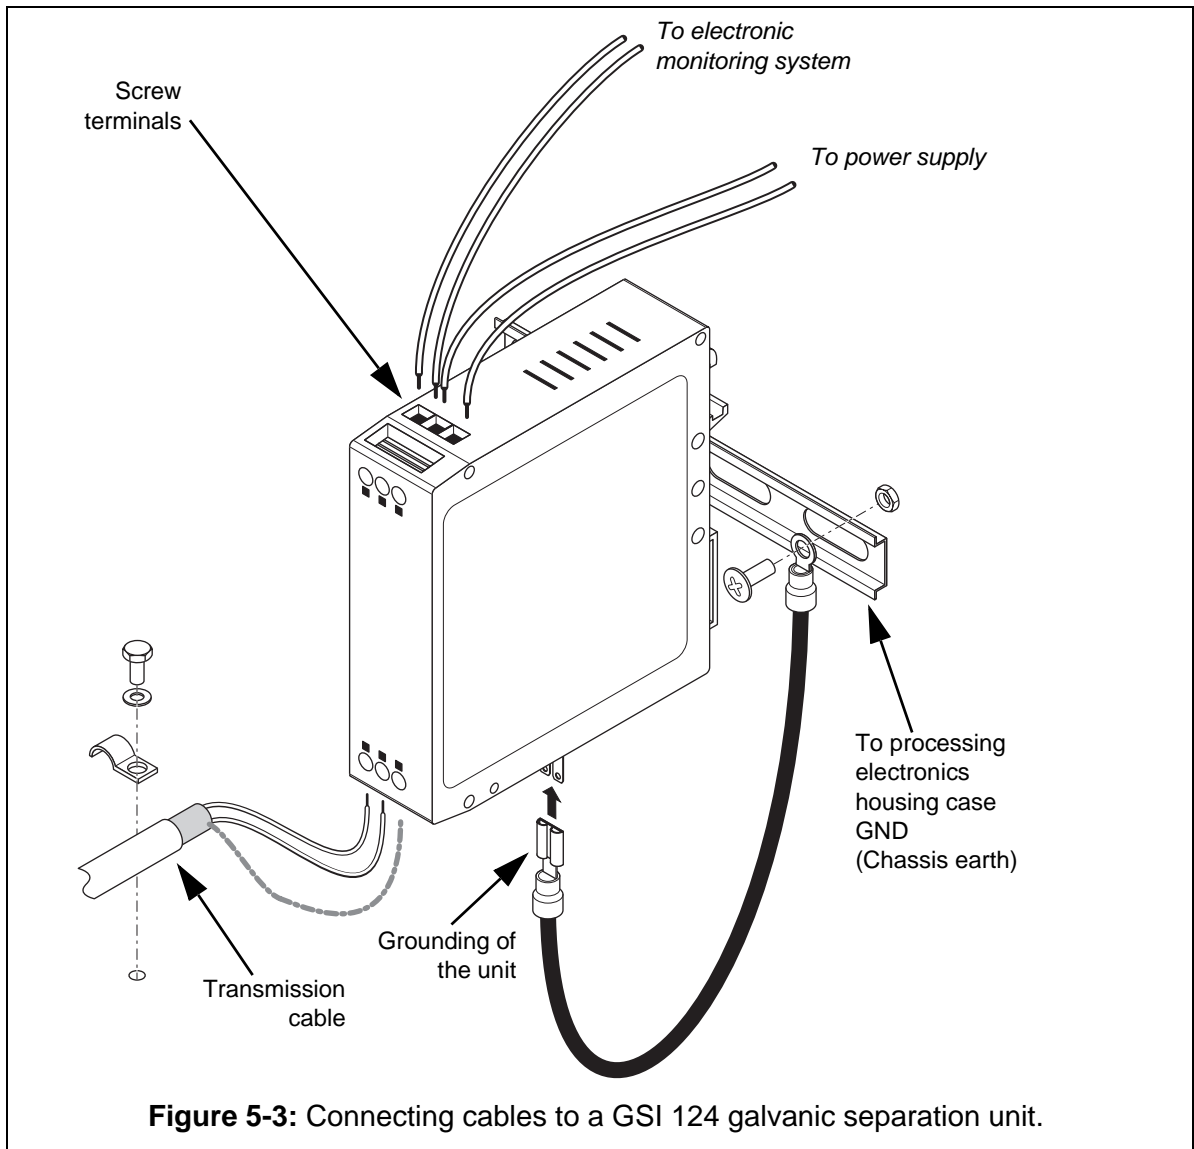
Connecting cables to a GSI 124 galvanic separation unit.
